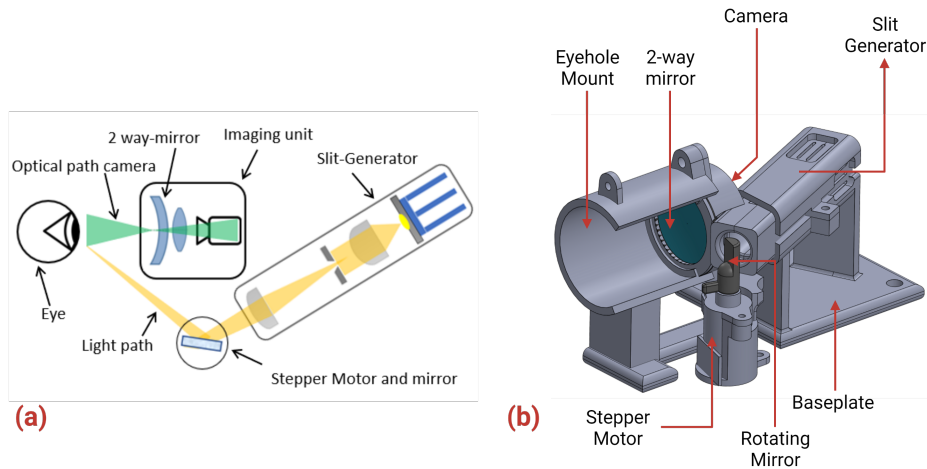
Slit lamp microscope components. (a) Design schematic and ray diagram, (b) CAD subassembly with mounts for all components.
